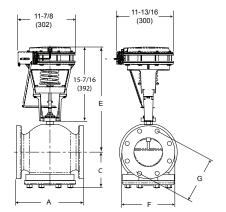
MK-6911 with Flanged 2-Way Globe Valves
